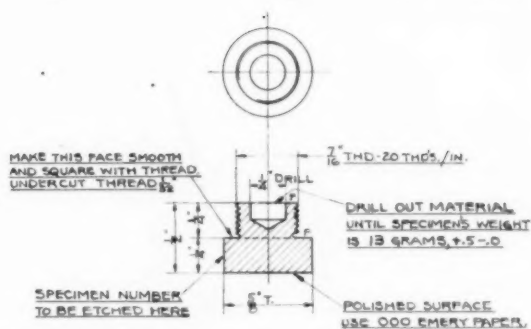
BUTTONS USED FOR TEST SPECIMENS IN CAVITATION MACHINE
